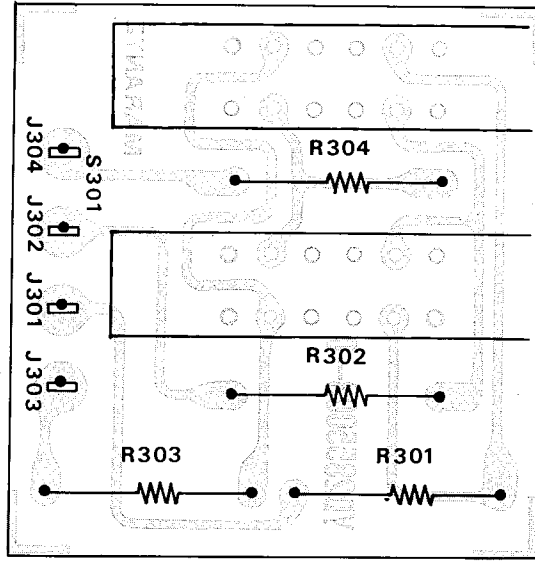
Main-Remote Speaker Switch Unit Assembly P300 Component Locations
